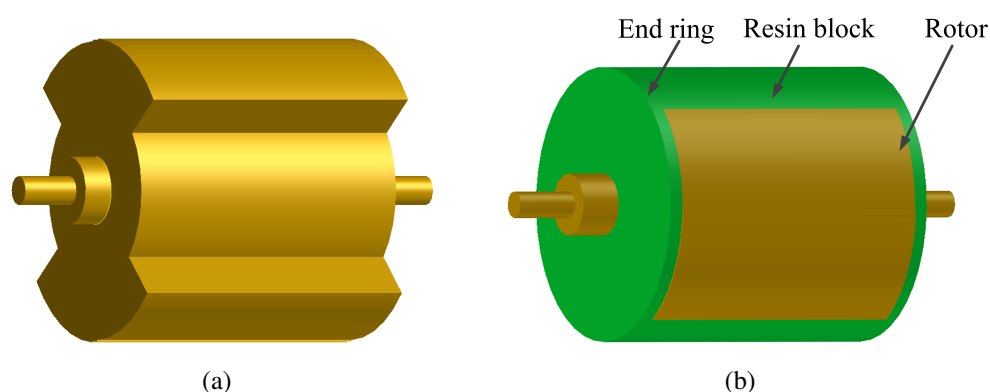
Rotor structure. (a) Stepped rotor. (b) Modified cylindrical rotor with high-thermal conductivity resin.
